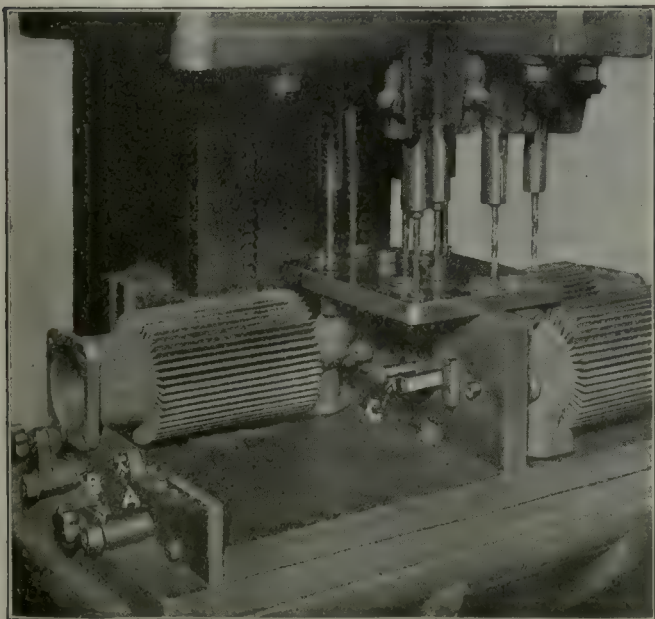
DRILLING OUTLETS ON BOTH SIDES
